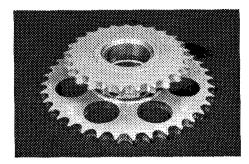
Sinter-joined Idler sprocket which is eliminated machining
